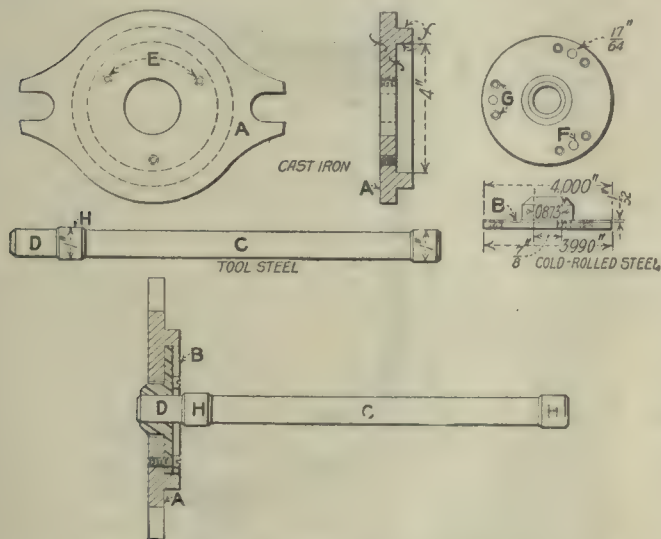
TOOLS FOR TESTING ALIGNMENT OF HEAD WITH WAYS
